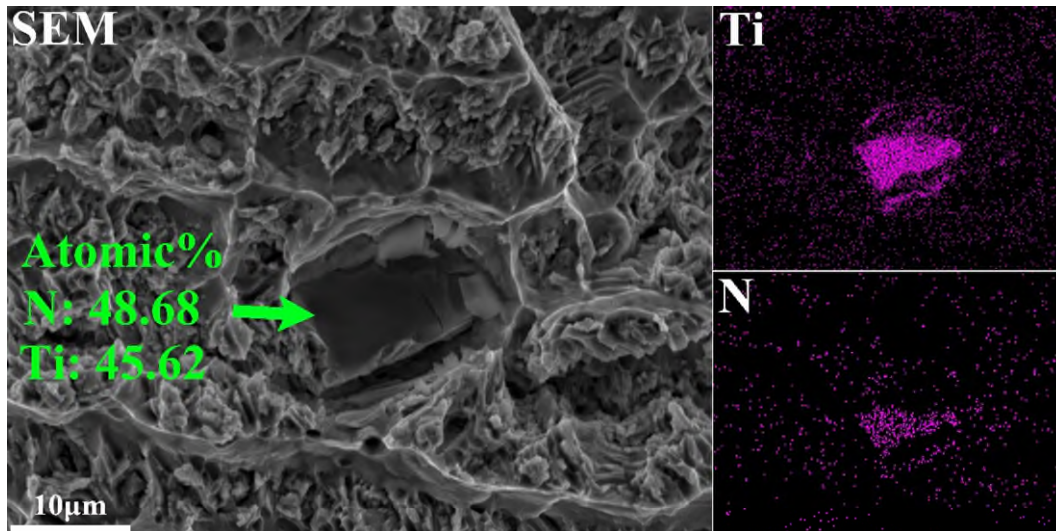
TiN inclusion found in the fracture surface of the WAAM IN718 built using Wire B.
